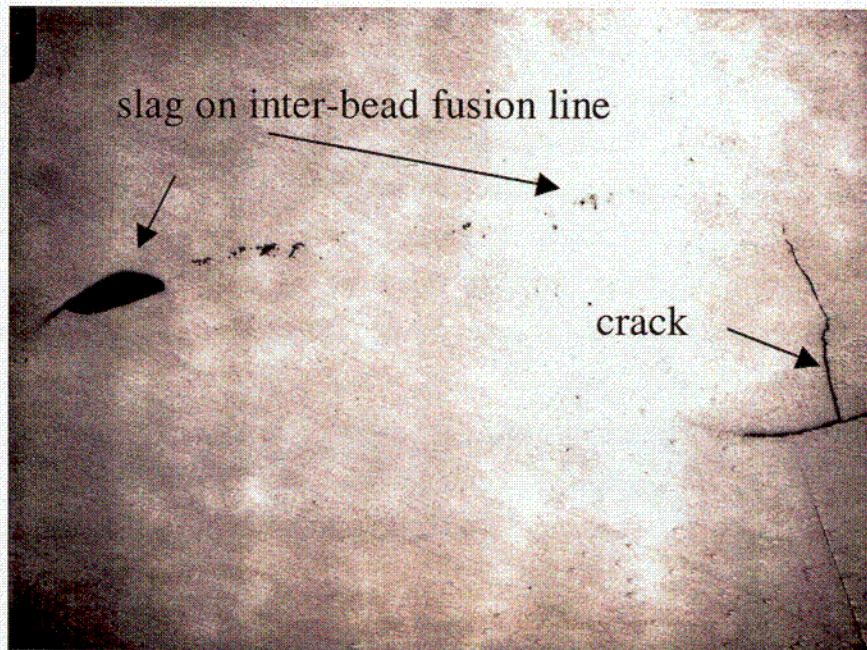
Micrograph of Cube 5-10EB1-IIbIIc Showing Flaws in the First Weld Pass of the Back-Fill
